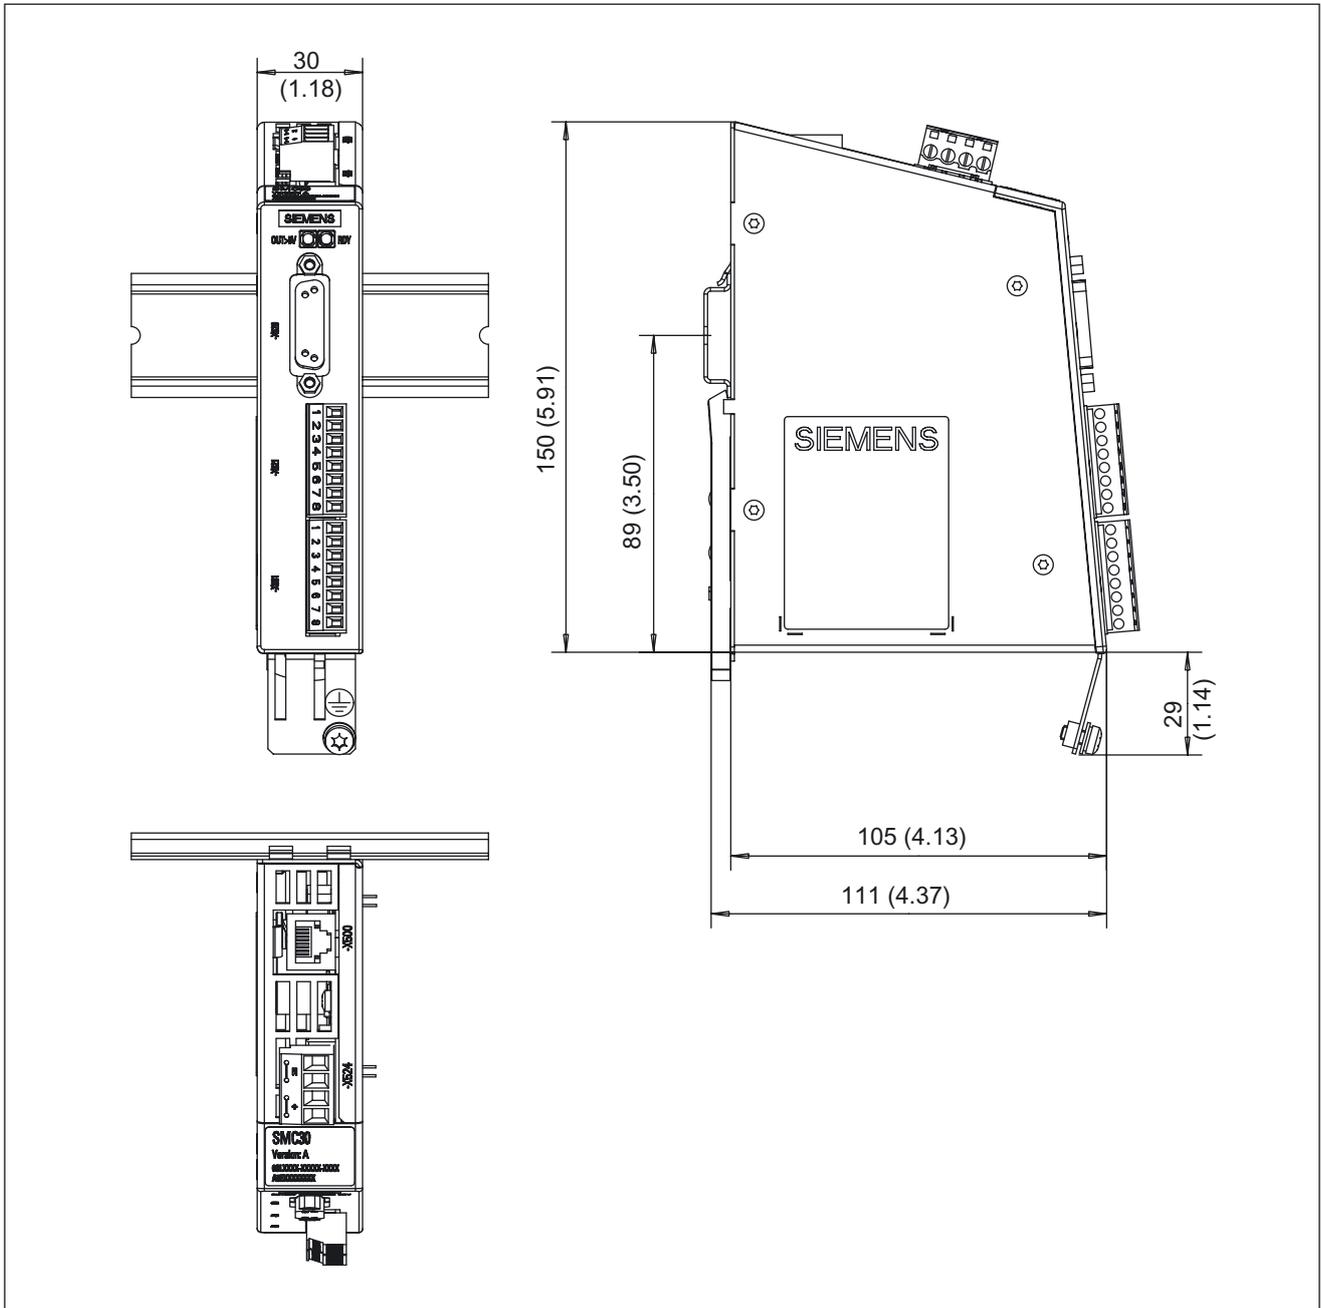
Dimension drawing SMC30: 30 mm wide
